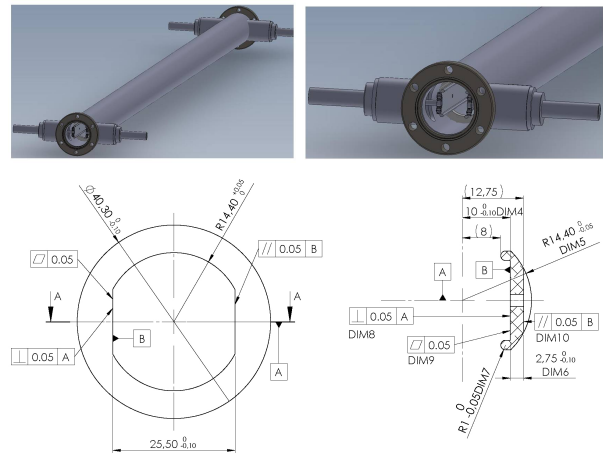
Prototype striplines and fabrication tolerances for the electrode supports and the electrodes.
